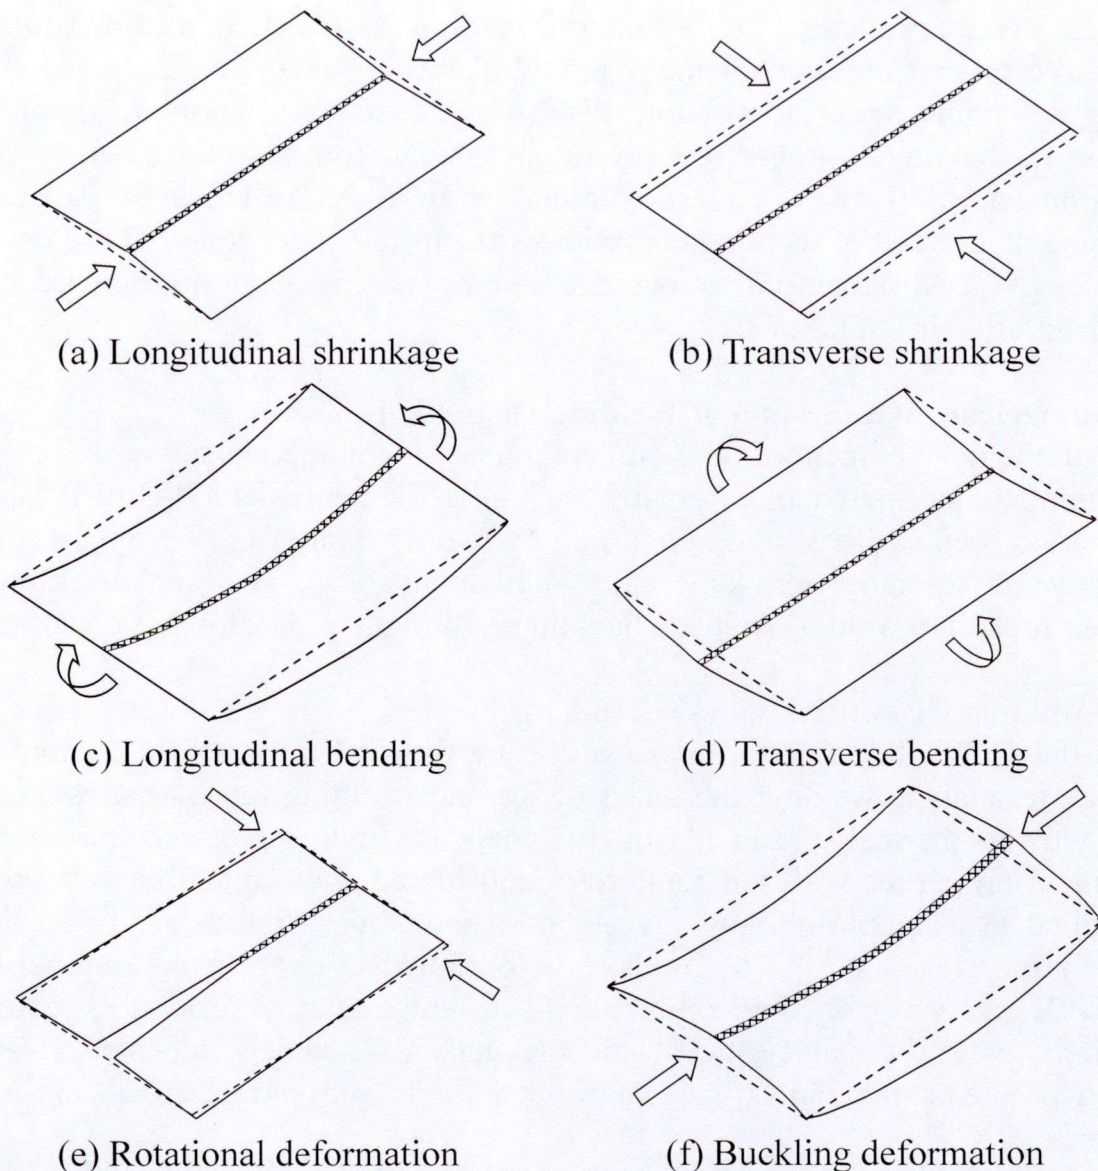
Basic types of welding distortion in thin plate butt welded joint.
